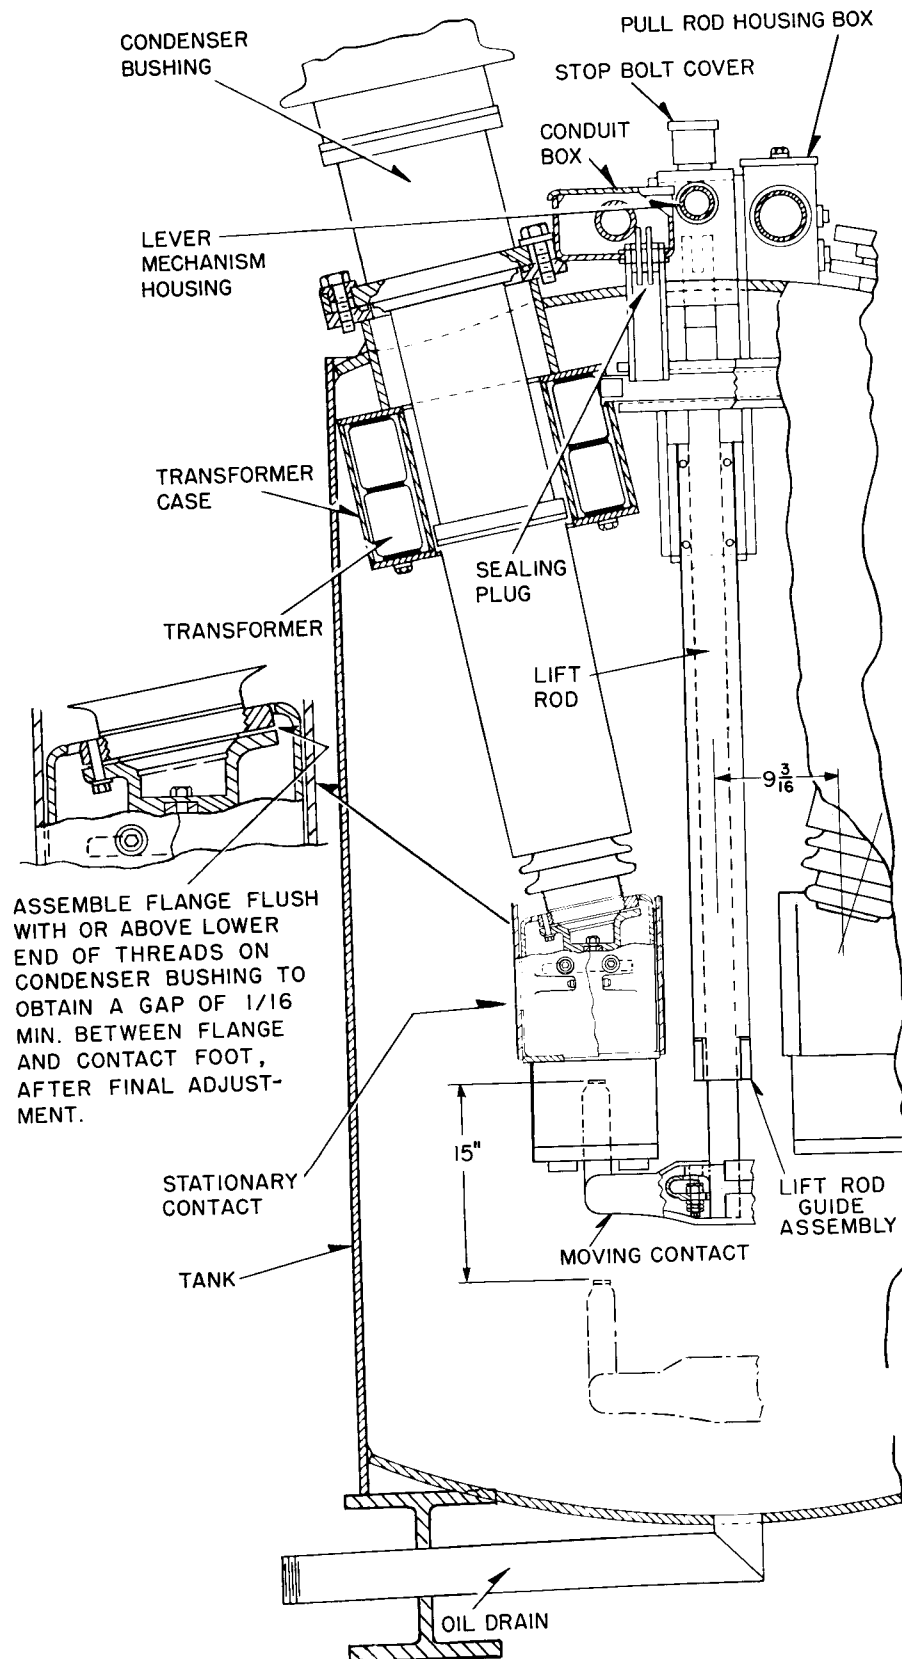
Section View of Pole Unit Assembly and Moving Contact Travel Dimensions
